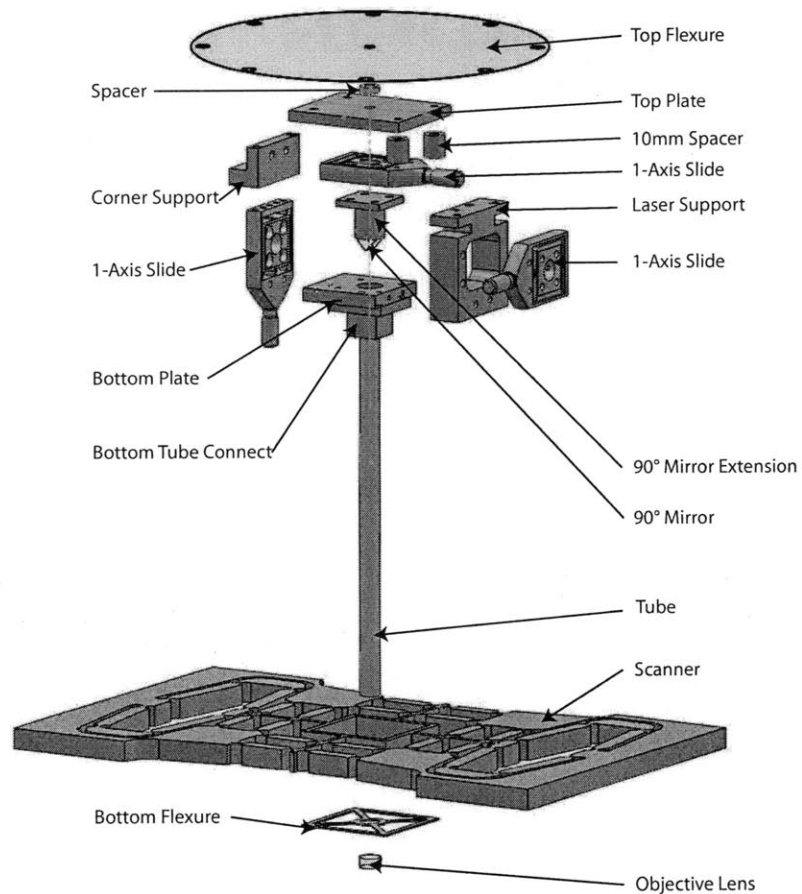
Exploded view of all mechanical parts in the optics subassembly of prototype 3.
